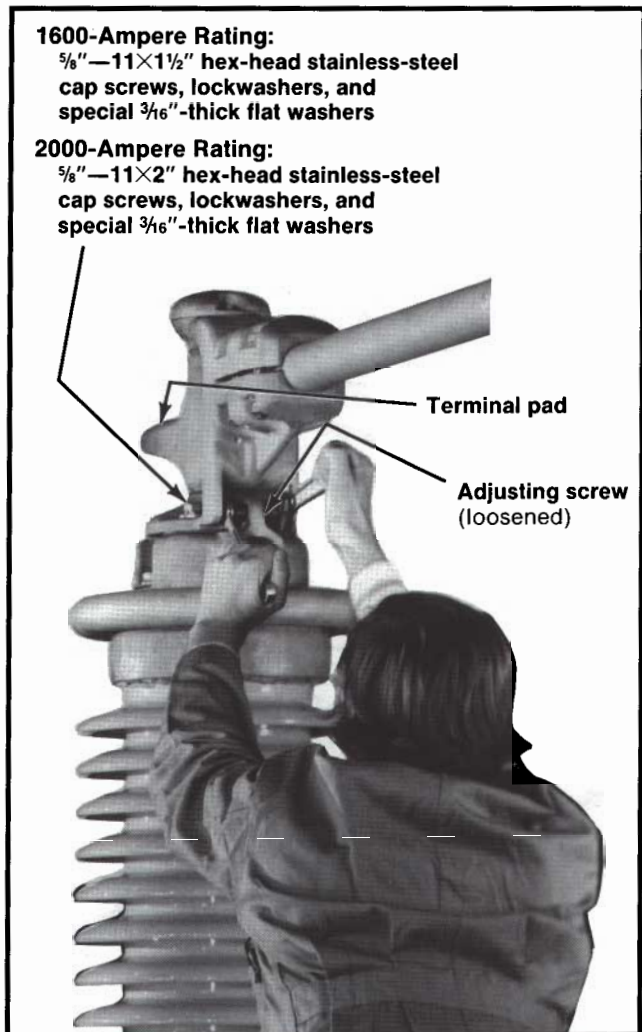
Assembling disconnect-blade assembly to blade-adjustment disc on terminal-end rotating insulator stack.
